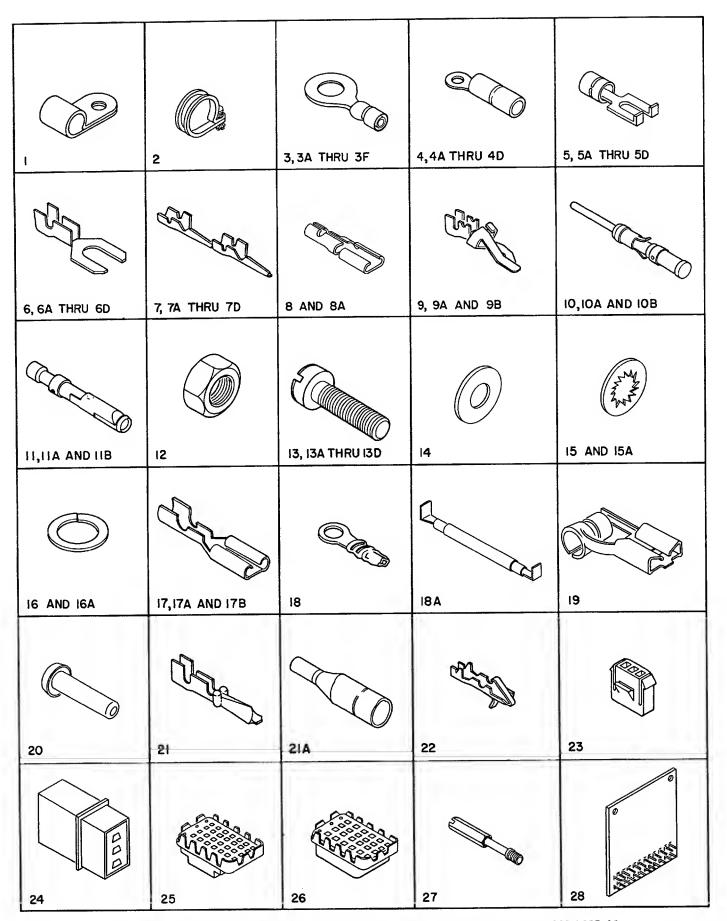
CABLE AND JUMPER ASSEMBLY COMPONENT PARTS. SHEET 1 OF 3. SEE LIST 19.
